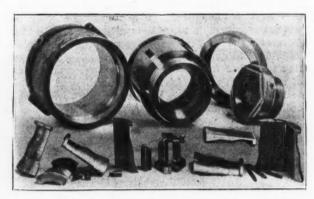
The Unassembled Parts of the Rod Chuck.
